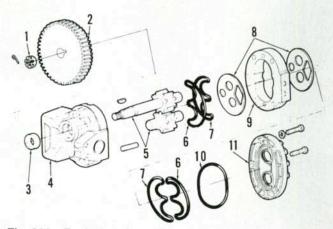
Exploded view of hydraulic pump used on early production TW-35 tractors.
